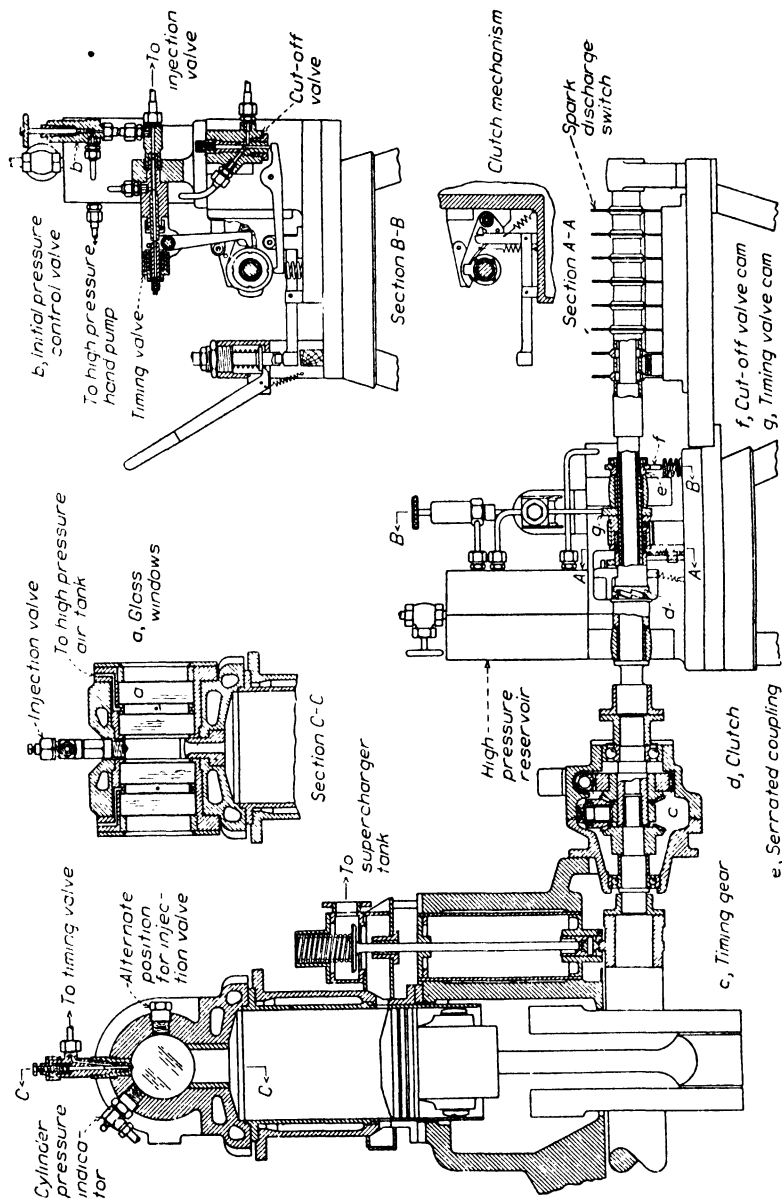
N.A.C.A. compression-ignition test engine unit.
